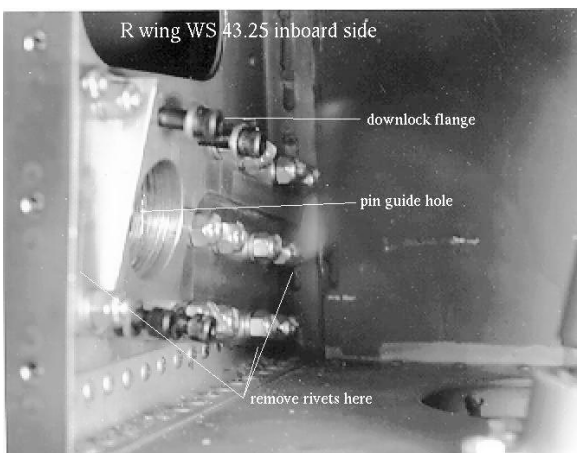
View from the bottom of the downlock plate installed in the right wing at WS 43.25. Note that the flange will overlap some of the factory pilot drilled rivet holes.
